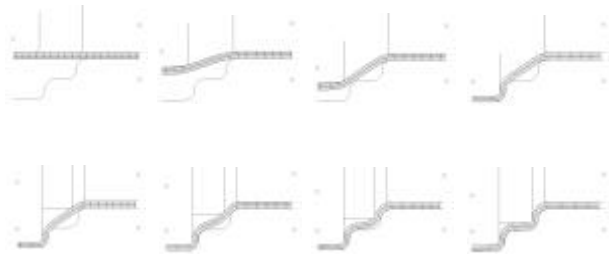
Deformation during Multi-Head Punch Deep Drawing
